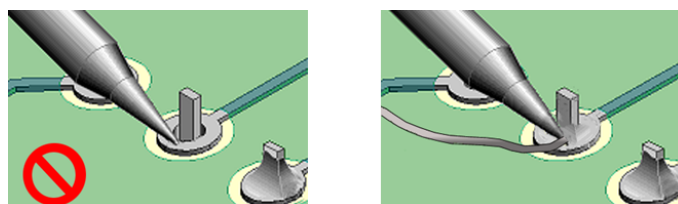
methods of soldering - the correct method on the right has the tip in direct contact with both the component leg and the PCB pad.
